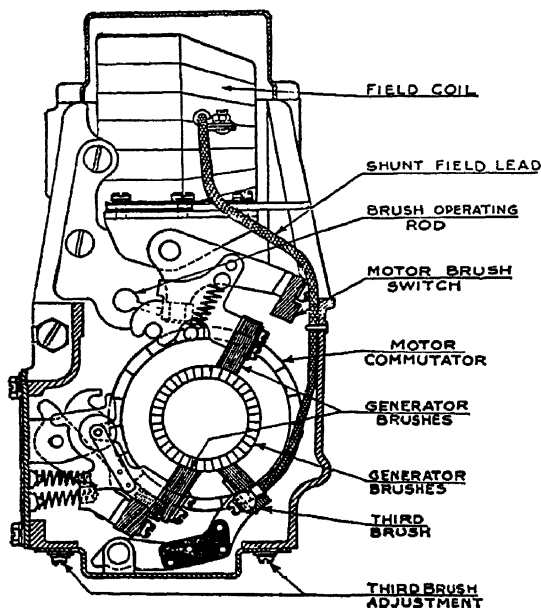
Sectional view of Delco motor-generator used on Buick "Six" (1917), showing brush arrangement.
